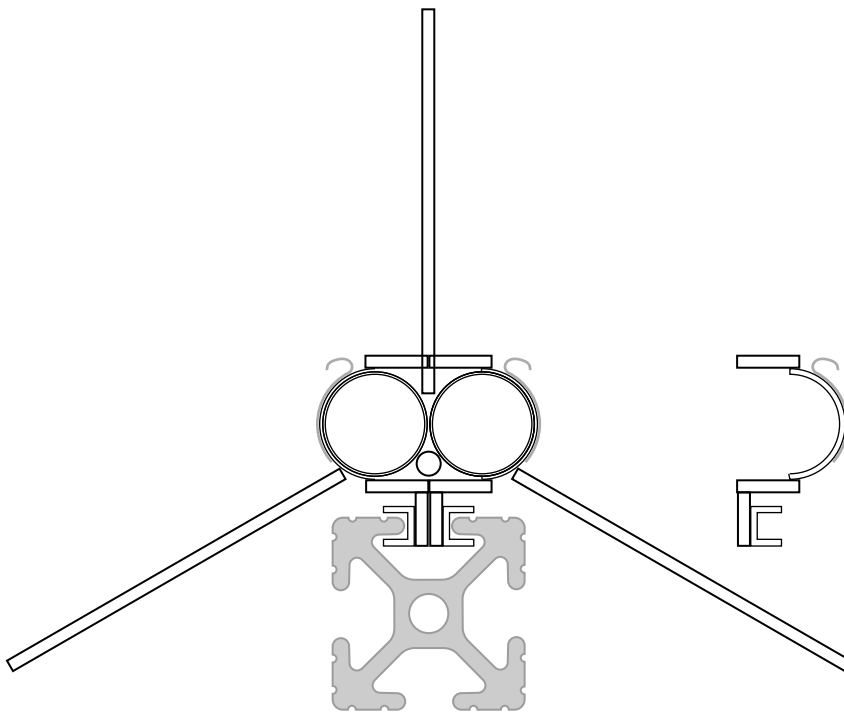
Cross-section drawing showing a two-motor cluster rocket (shown in Photo 24) engaged on the launch rail. On the right is a isolated view of the cradel and the runners.
